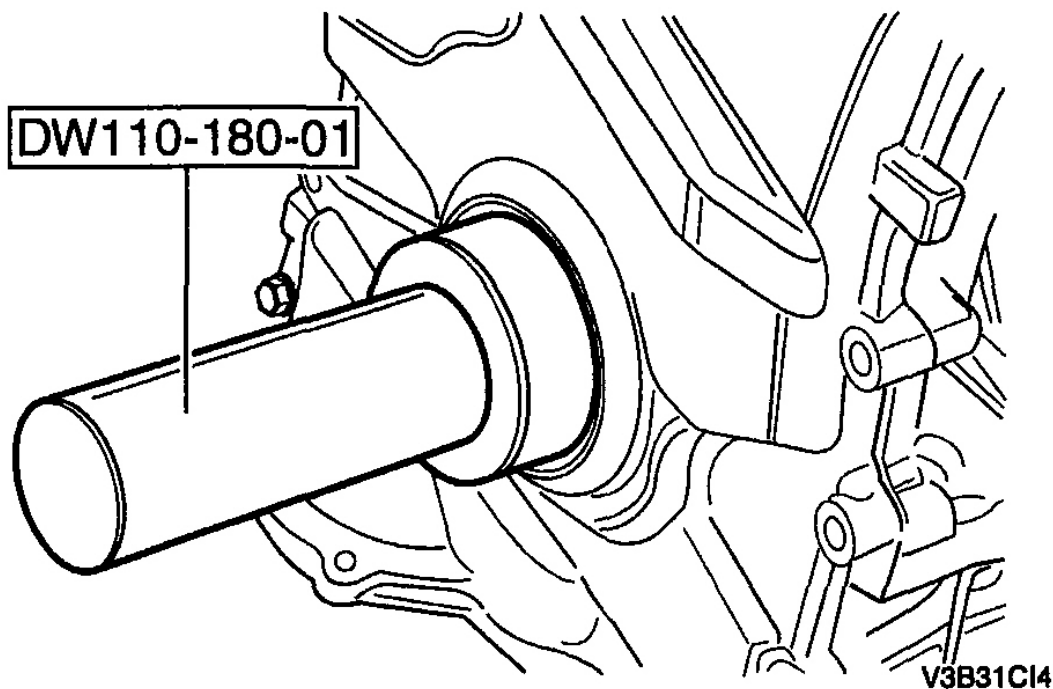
Installing Crankshaft Front Oil Seal Using Crankshaft Front Oil Seal Installer DW110-180-01
